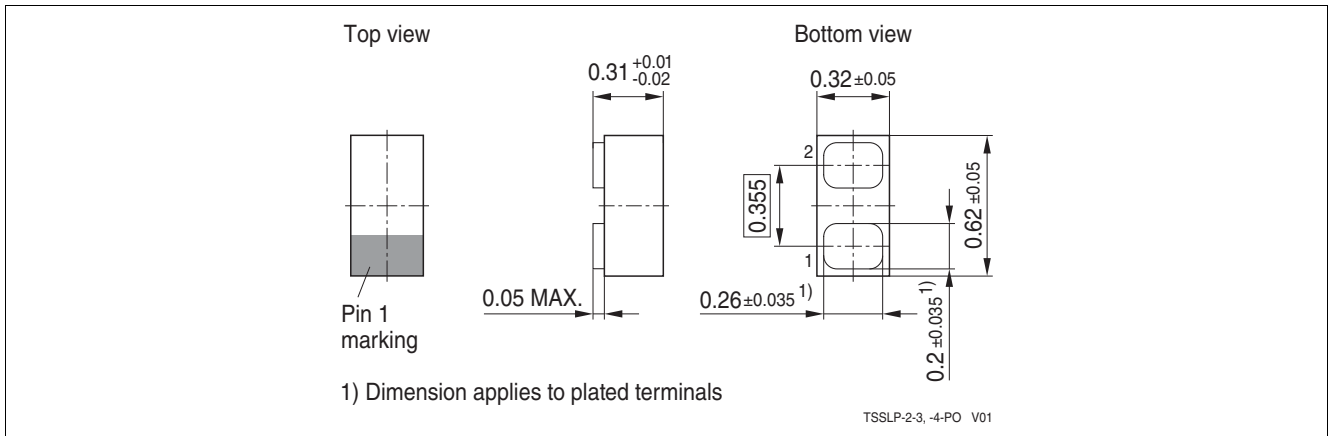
TSSLP-2-4 Package outline (dimension in mm)
